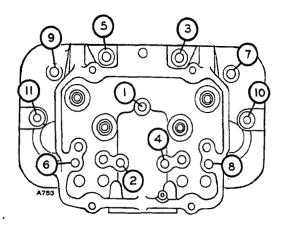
CYLINDER HEAD BOLT TORQUE SEQUENCE
